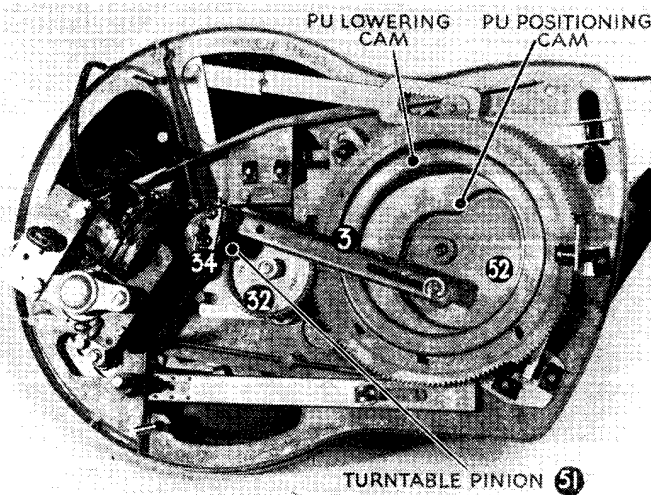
Underneath view reveals the turntable pinion and the PU lowering and positioning cams
